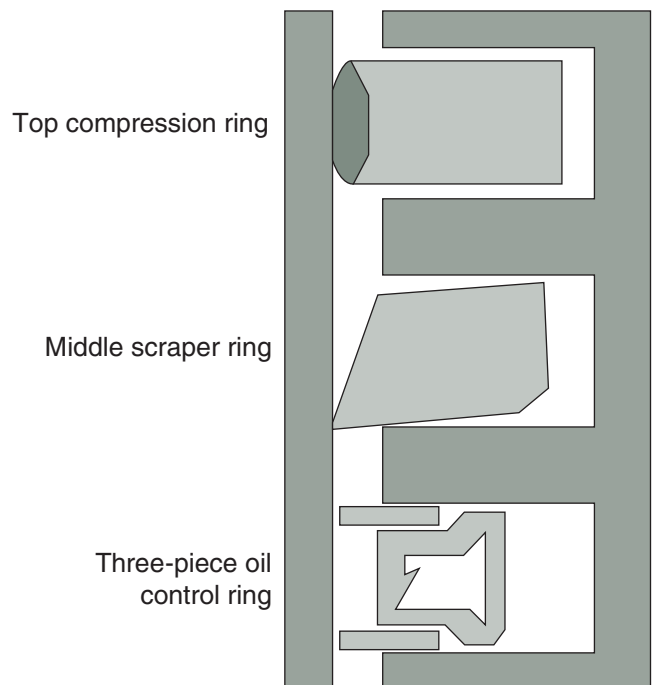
The three rings found in a typical four-stroke power equipment engine.
